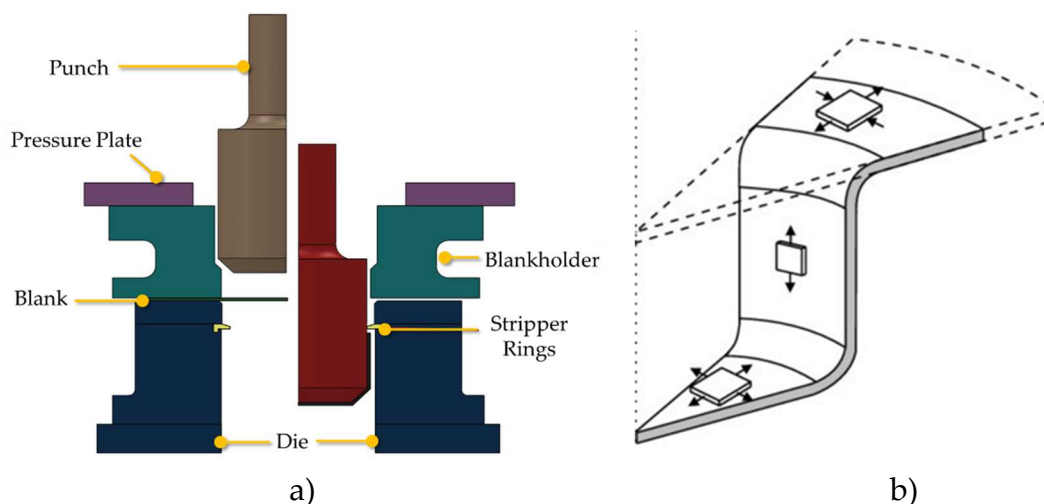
Deep drawing process: a) main components [14] and b) stress conditions over the formed blank [22]
